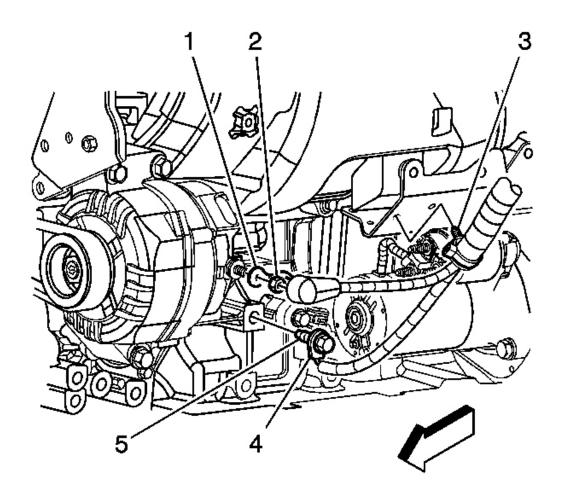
Starter Wiring (2 of 2) Courtesy of GENERAL MOTORS CORP.
